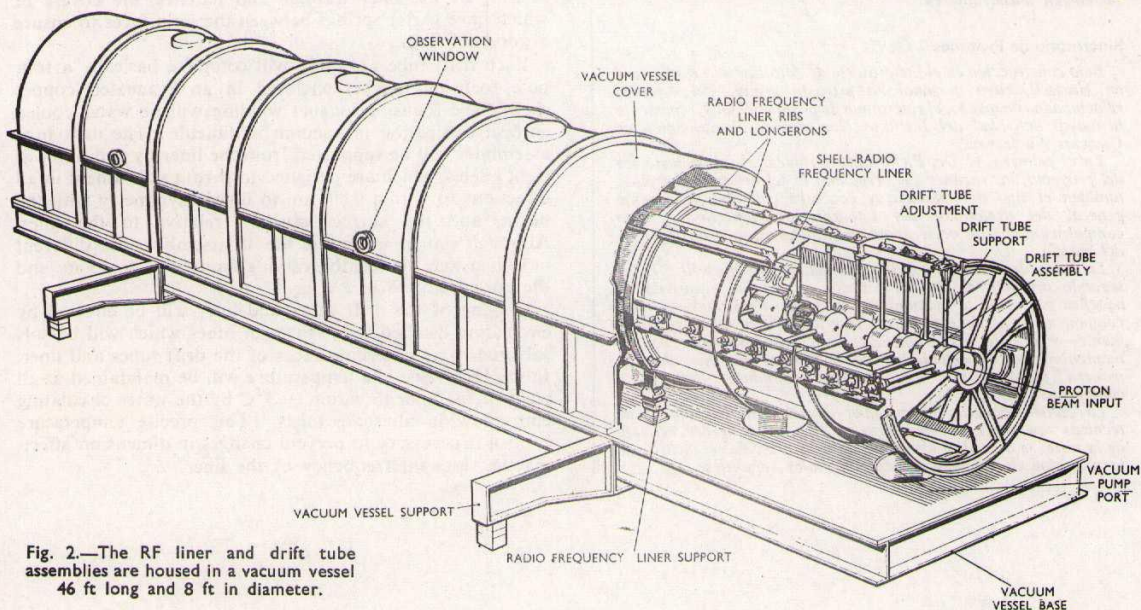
The RF liner and drift tube assemblies are housed in a vacuum vessel 46 ft long and 8 ft in diameter.
